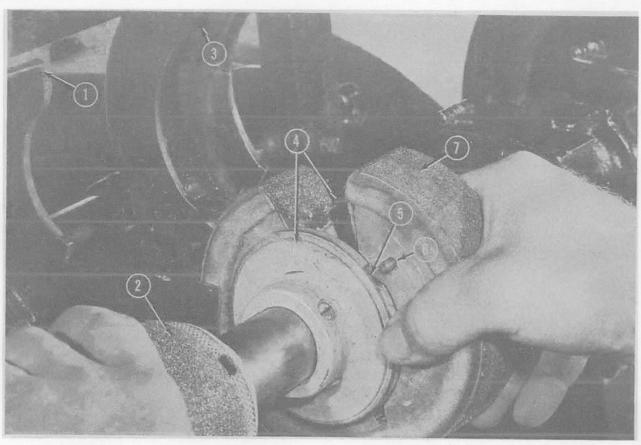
and the hood of the bottom sander (1). Turn upper shaft by hand until the opening joint of the heel sander is turned up and is facing the oper- ator. Grasp bottom sander (2) with left hand to hold shaft securely. VVith right hand strike down- ward on lower segment of heel sander (7) to open segments in direction that shaft turns. When seg- ment are loose in the collars (4) turn segments until segment pin (6) in segment coincides with notch (5) in collar. Lift segment up until the work(ng space between the open ends of the seg- ments is sufficient to remove paper. Lift ends of paper off the paper-retaining pin (1, 2, fig. 137) and remove paper from sanding wheel.
